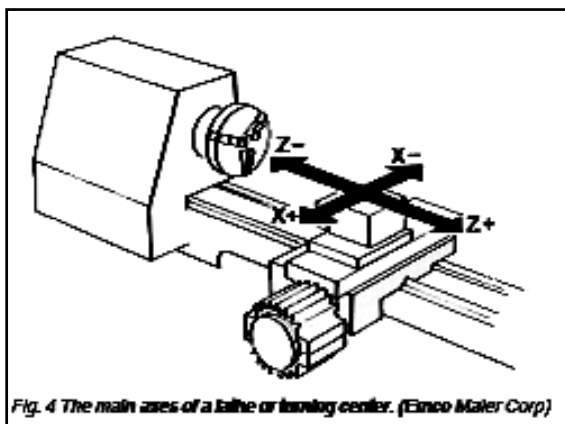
The main axes of a lathe or turning center. (Emco Meler Corp)
